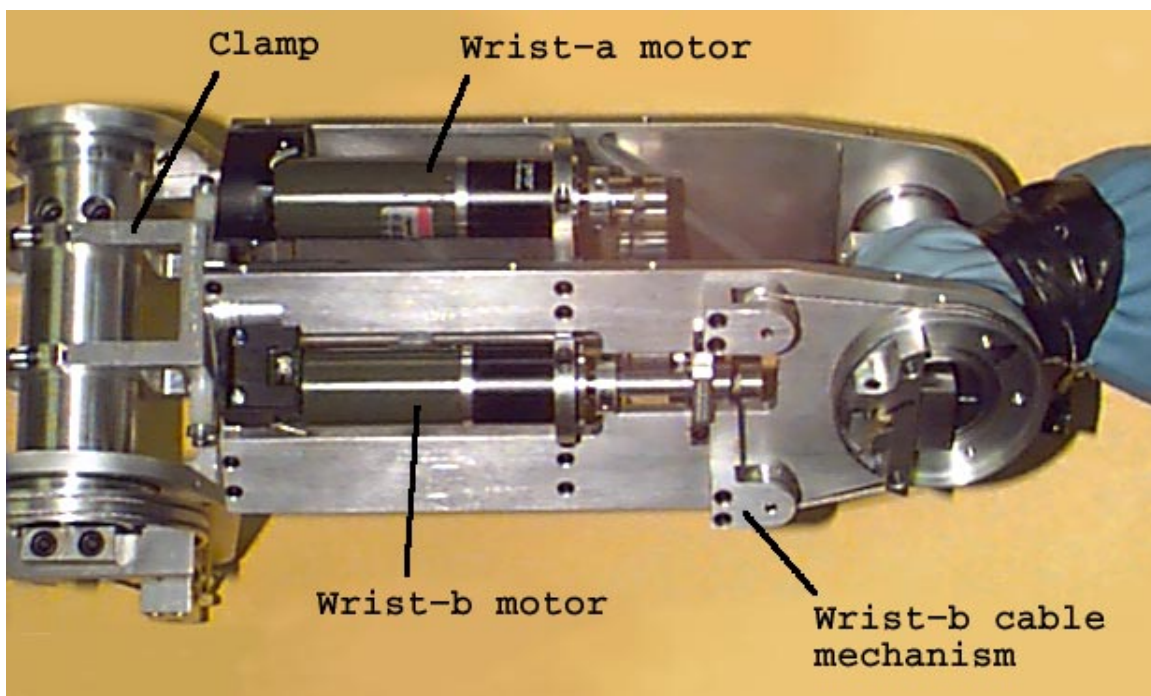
Lower arm design. The upper motor drives the wrist-a joint, moving the whole lower arm section around its longitudinal axis. The lower motor drives the wrist-b joint using two extra pulleys. The lower arm is attached to the elbow-b joint using a clamp to facilitate assembly.
